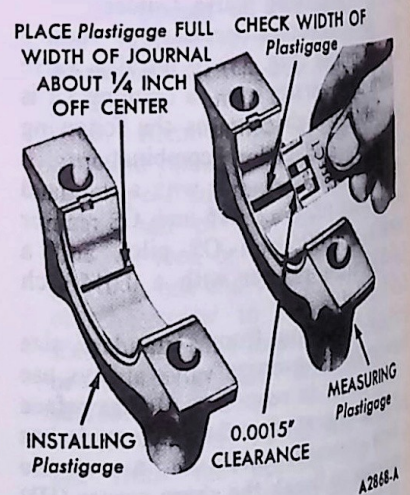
Installing and Measuring Plastigage—Engine Installed
